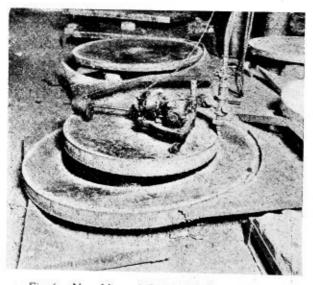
Near View of Cutting Machine and Weld
